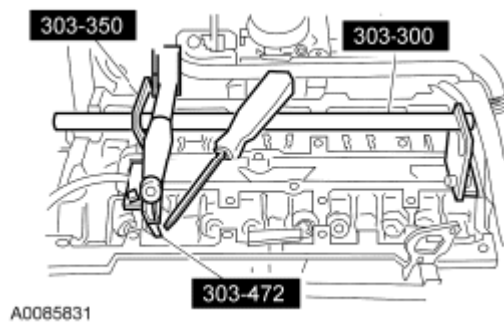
Identifying Valve Spring & Valve Spring Retainer Special Tools
